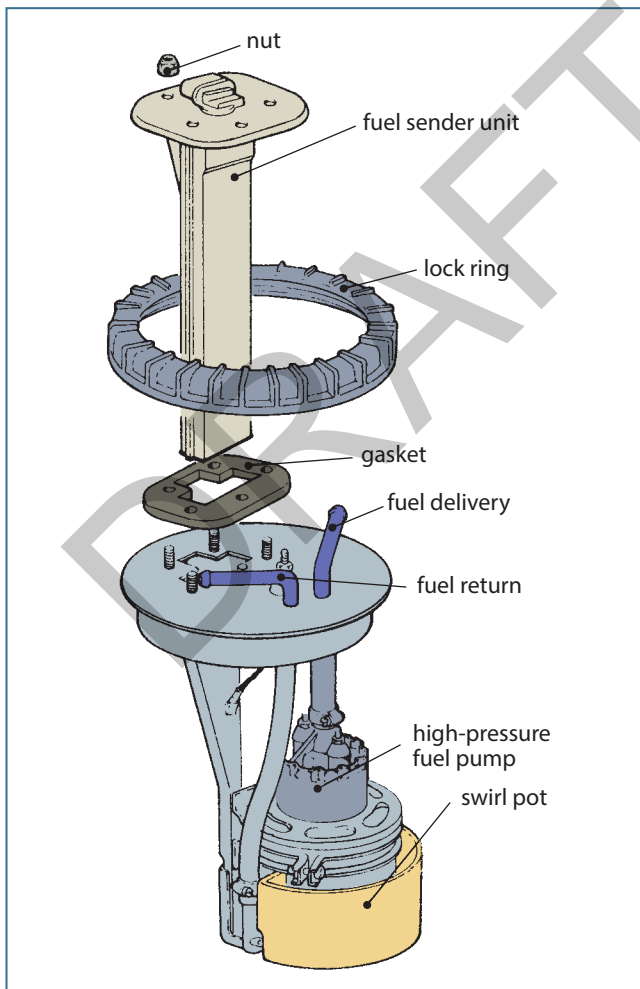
Rotary electric-pump assembly for installation in the fuel tank FORD
